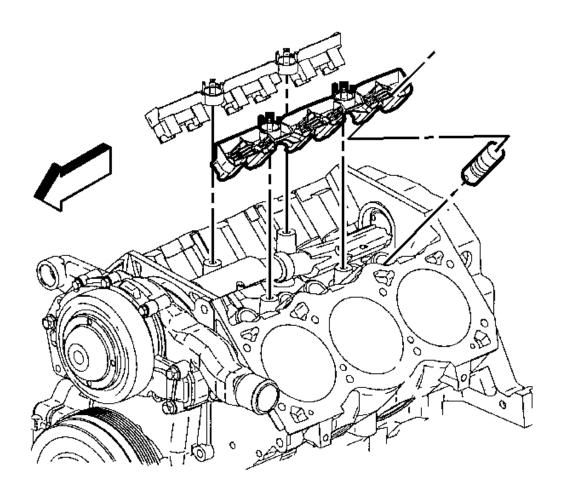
Identifying Valve Lifters & Guides Courtesy of GENERAL MOTORS CORP.
